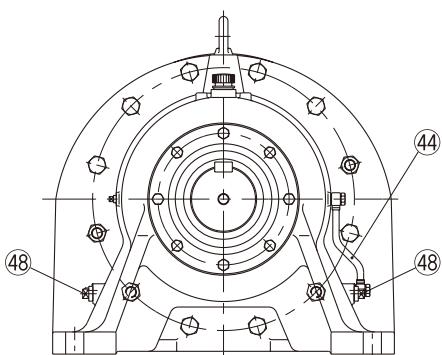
Type CHHM (Horizontal, Gearmotor) Single reduction
